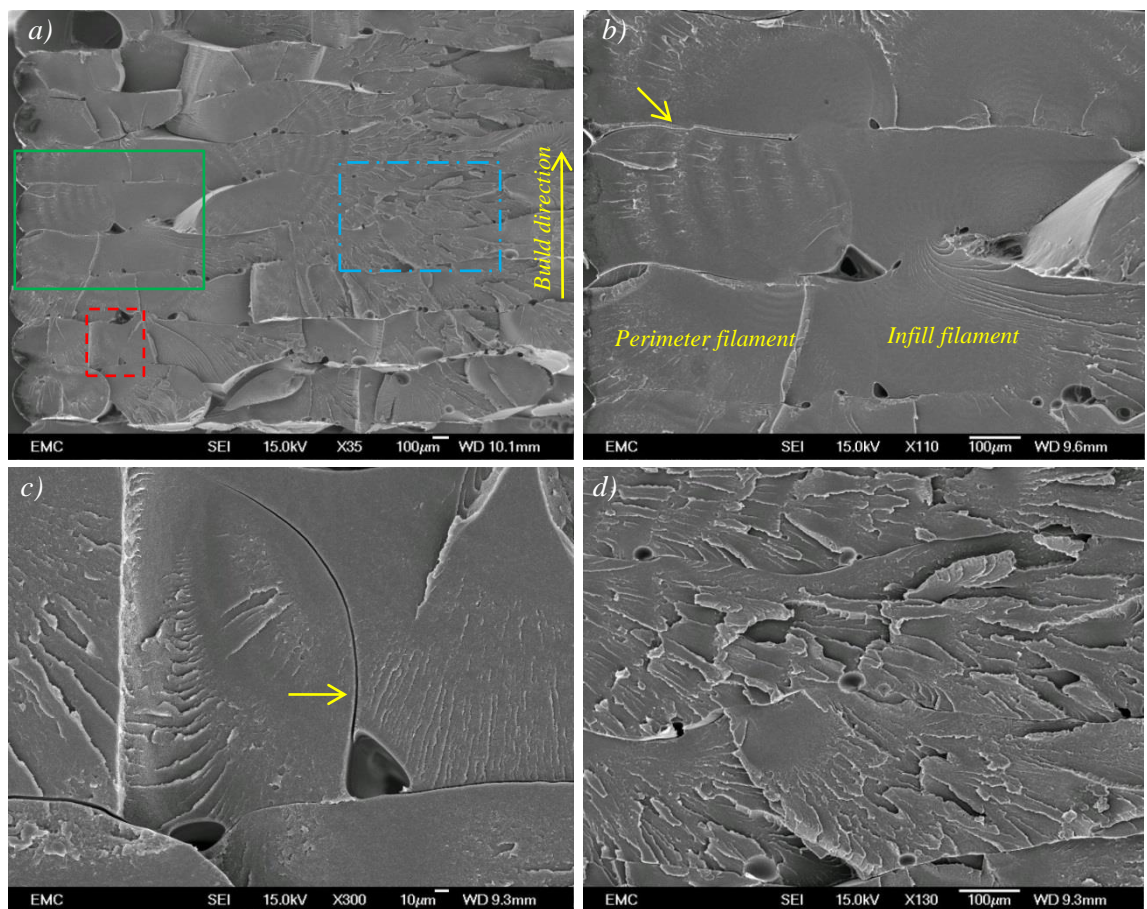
(a) Fracture surface of PEEK tensile test sample showing excellent infill filaments bonding in each layer; (b) magnified view of the green solid inset box; (c) magnified view of the red dash inset box; and (d) magnified view of the blue dash dot inset box
